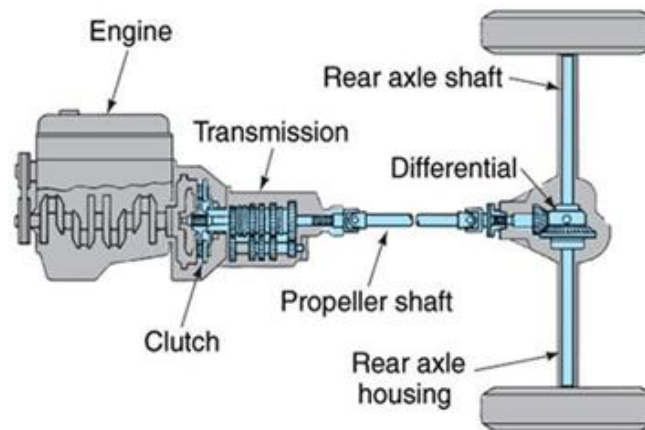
Front engine rear wheel drive (RWD) arrangement of drivetrain components
